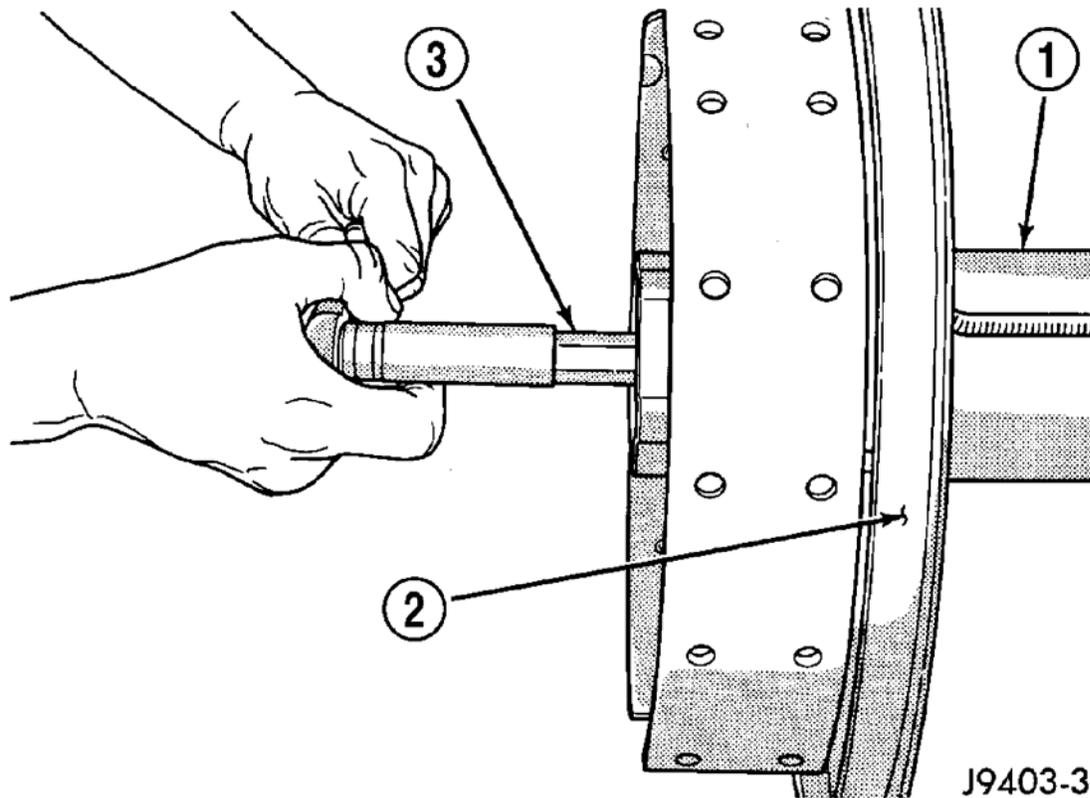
Identifying Axle Tubes & Adjuster C-4164
